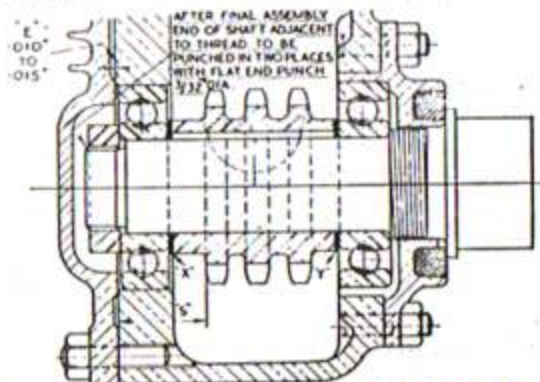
ALTERNATOR DRIVING SPROCKET ASSEMBLY
